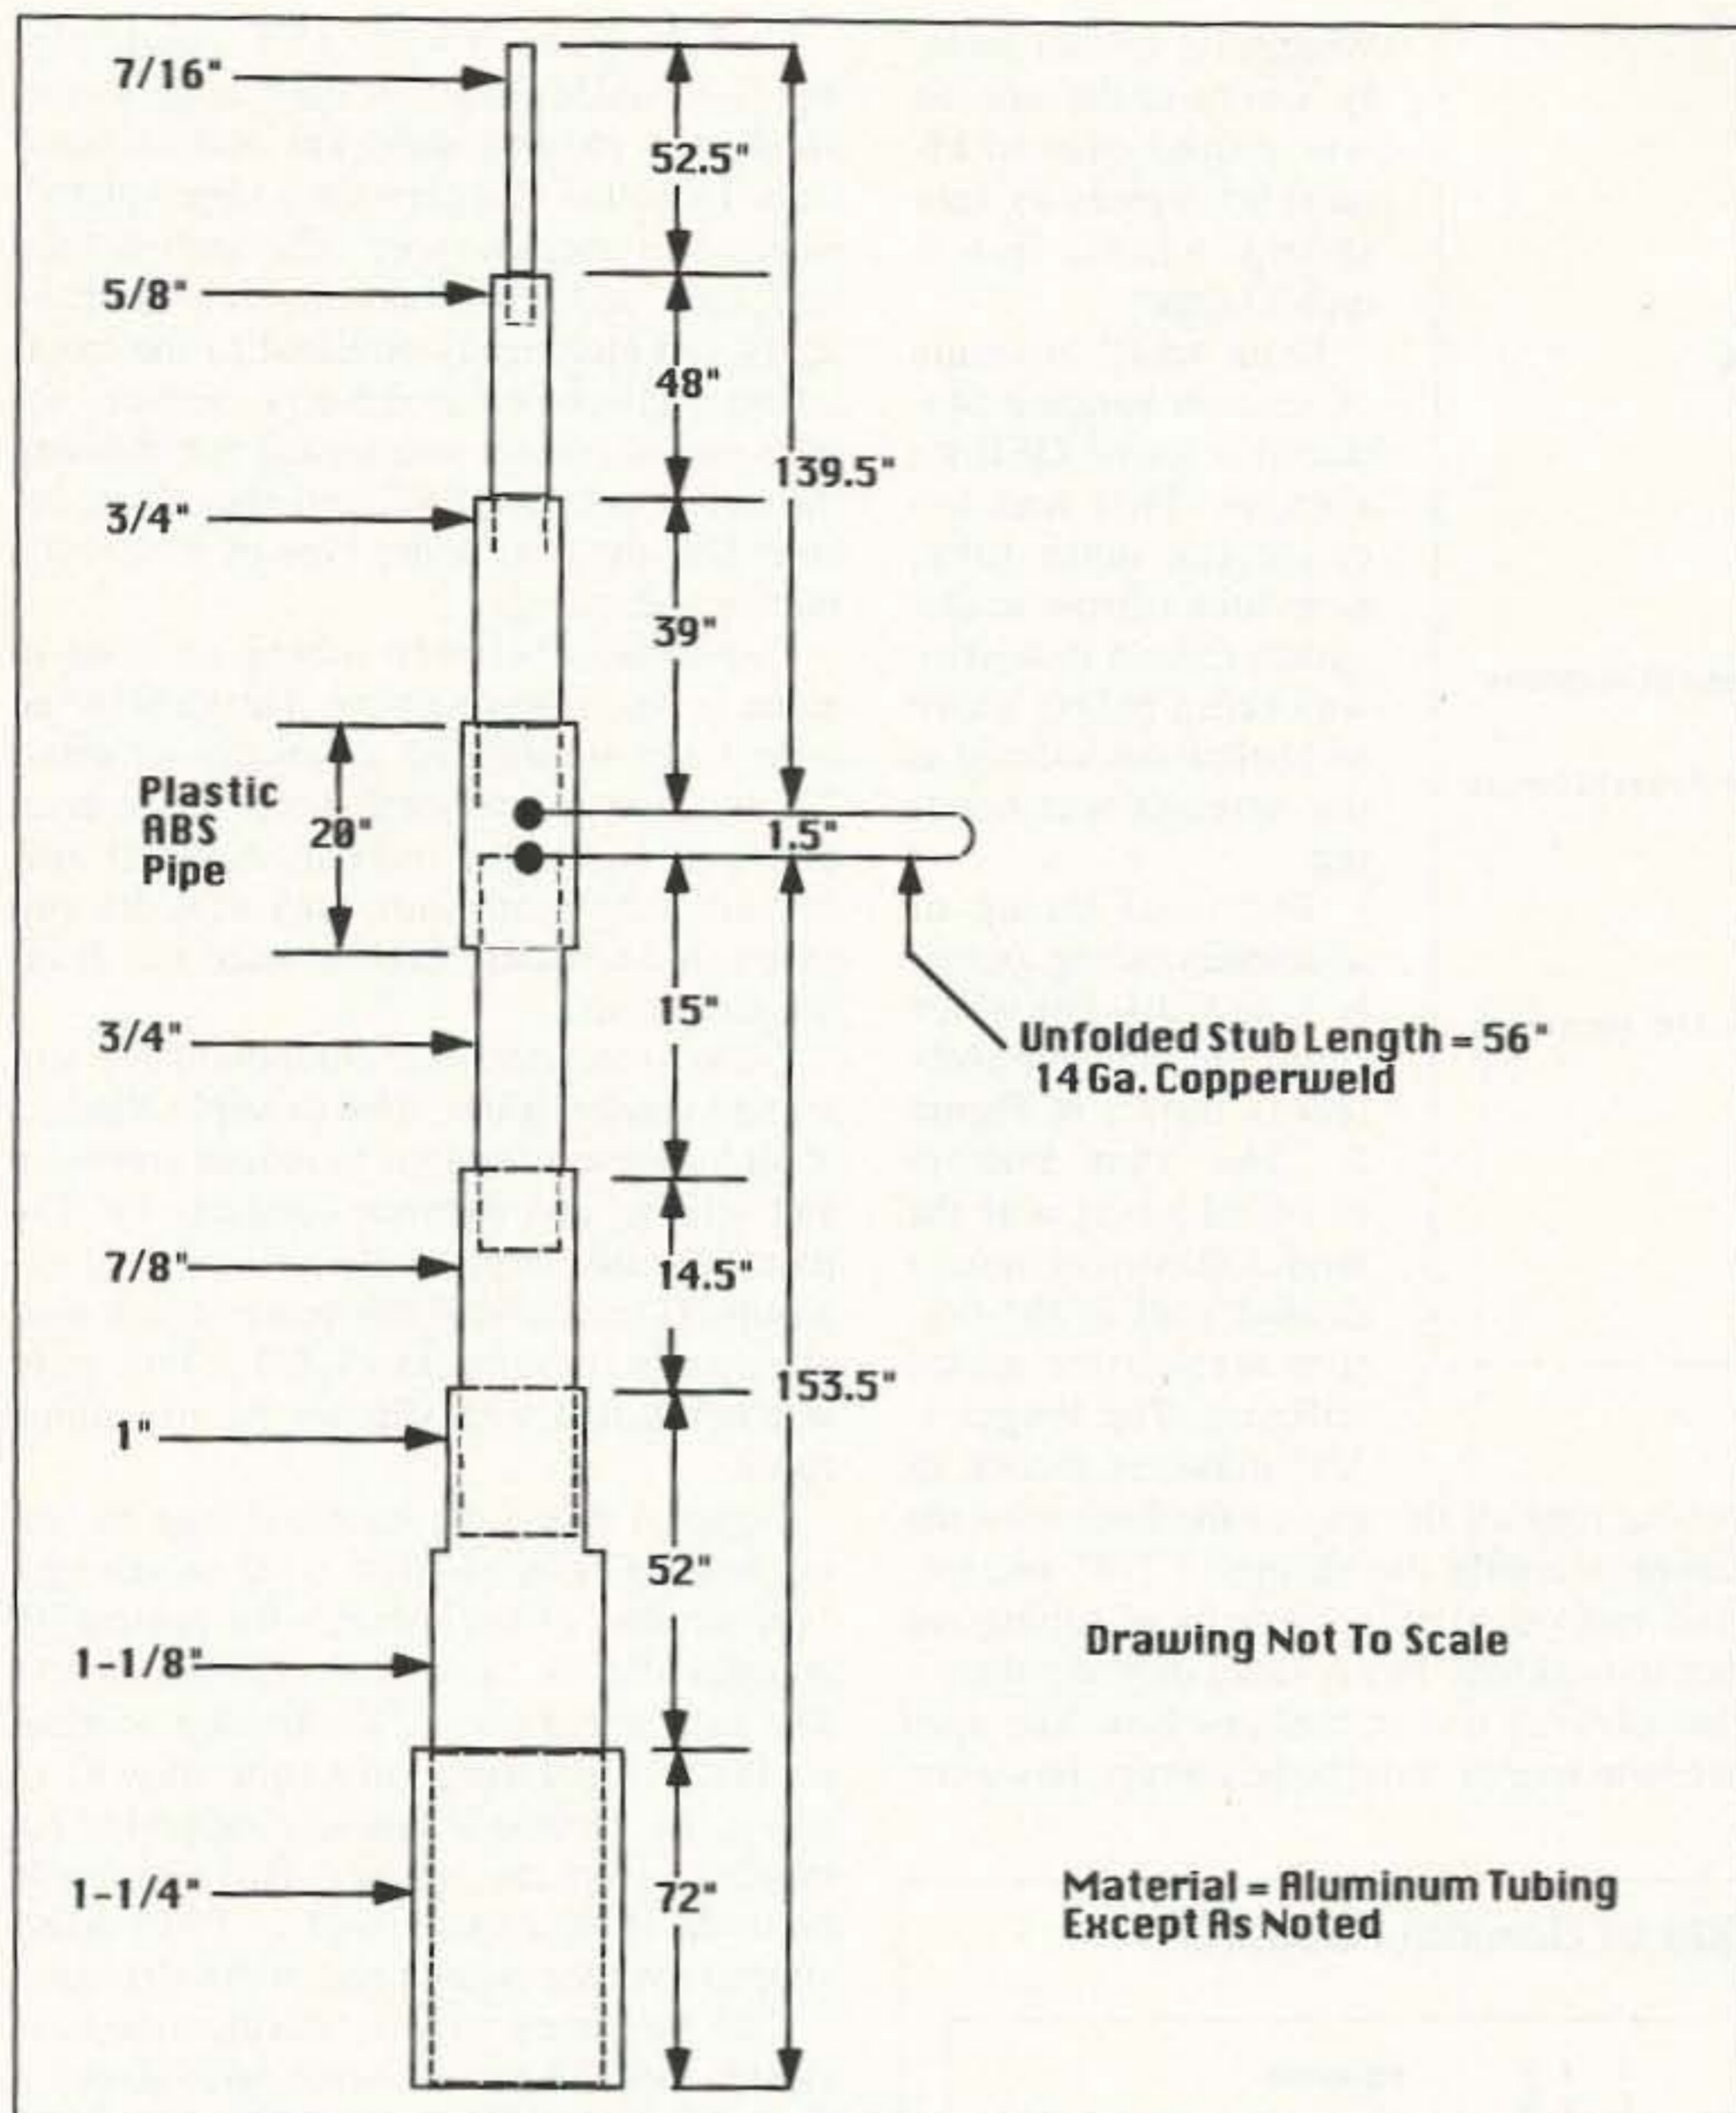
Sizes of aluminum tubing used in construction. Note that the stub connects through a section of white PVC pipe.
